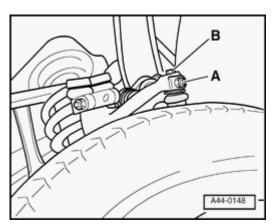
Loosening Hex Head Nut & Unscrewing Bolt Courtesy of VOLKSWAGEN UNITED STATES, INC.
